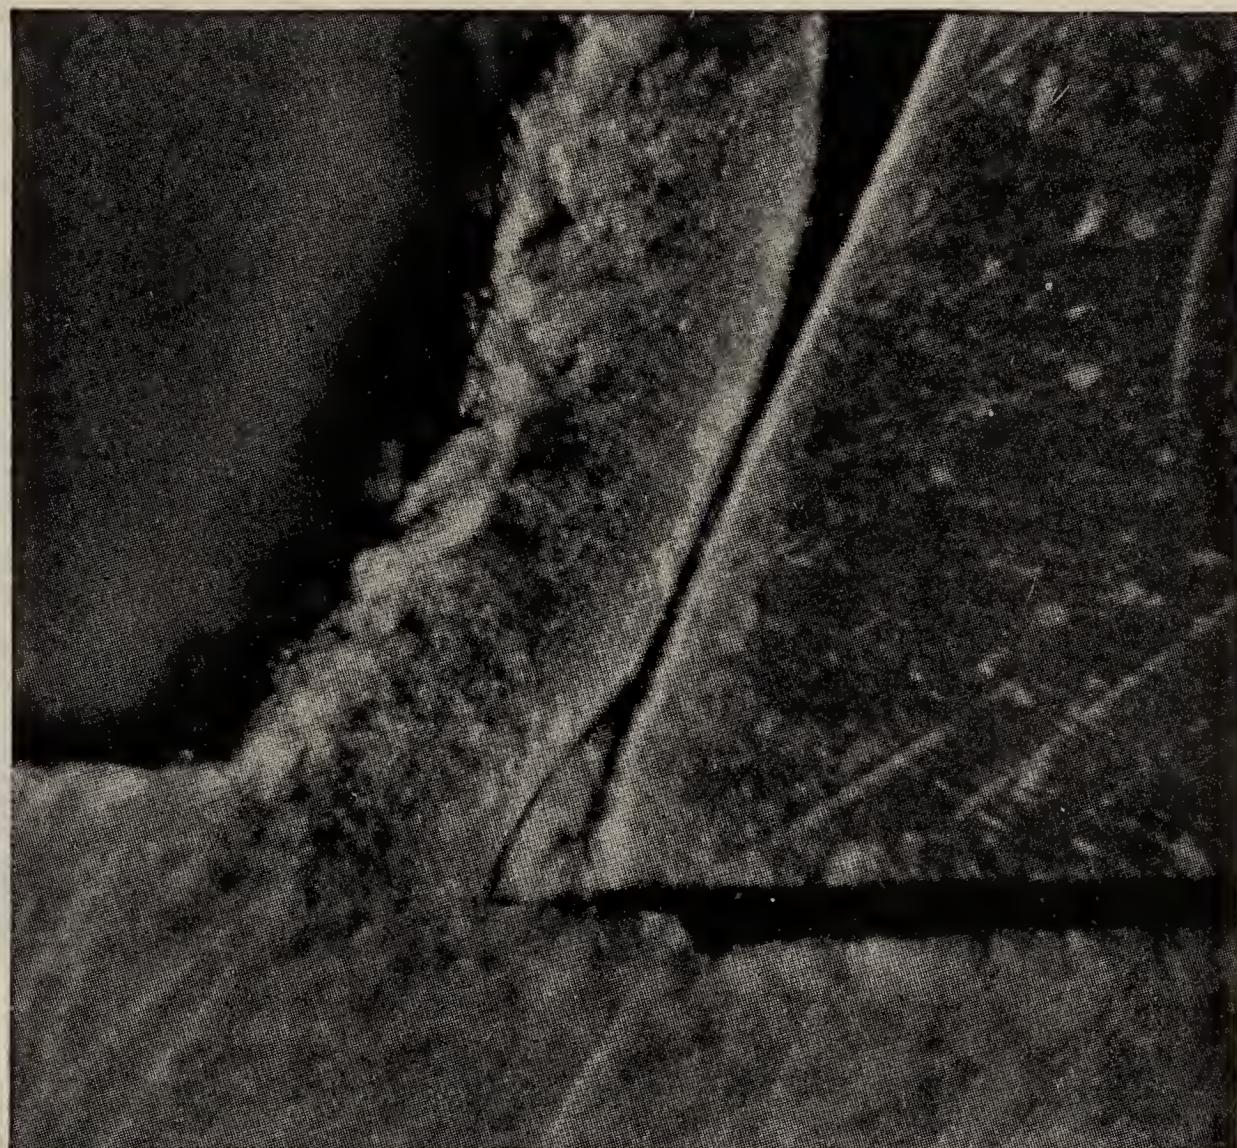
Built-up edge on planer tool. (*Courtesy of Cincinnati Milling and Grinding Machine Company.*)
